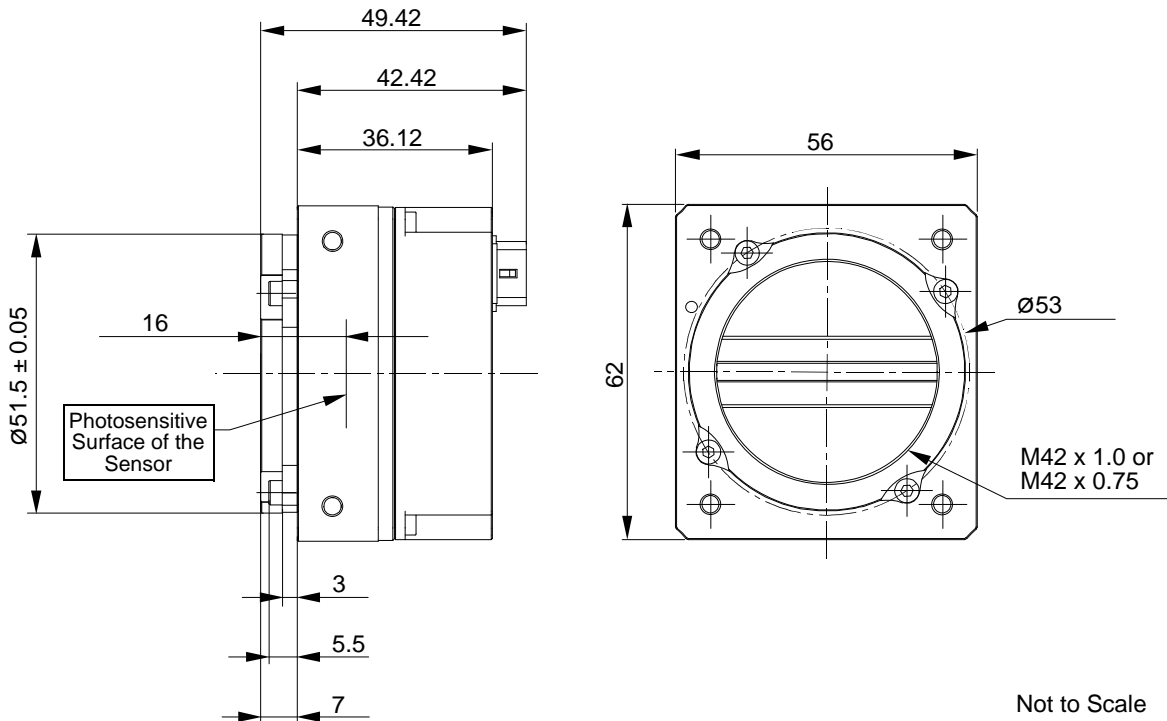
M42 x 1.0 or M42 x 0.75 Mount Adapter on a racer GigE Camera; Dimensions in mm
